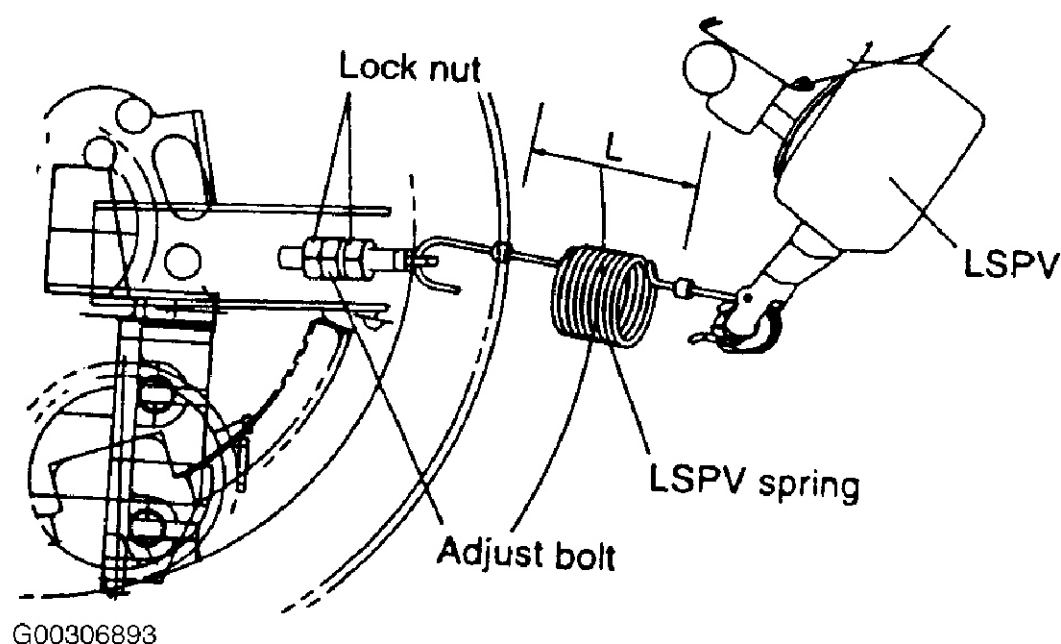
Adjusting Load Sensing Proportioning Valve (LSPV)
